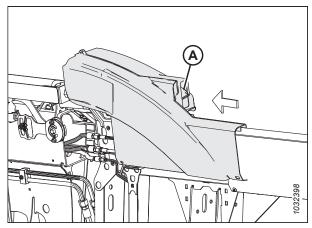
Right Outboard Linkage Cover – View from Rear of Header
